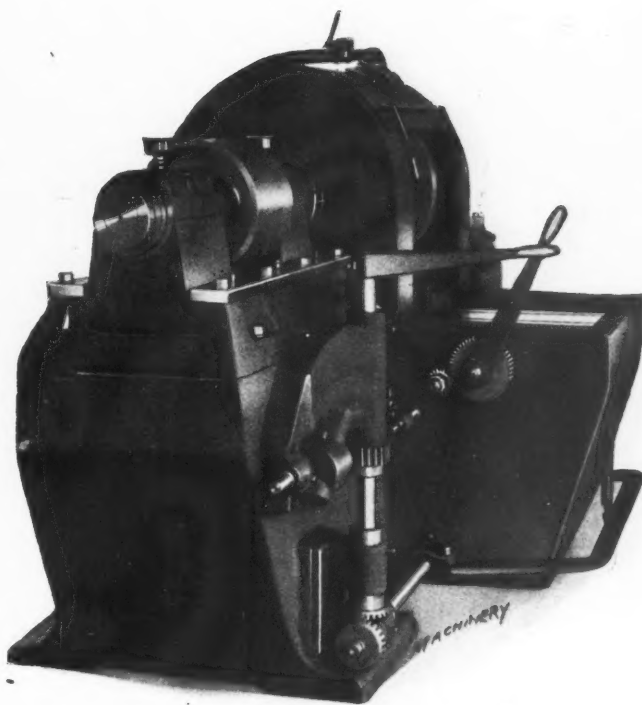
End View, showing Arrangement of Spindle Head and Sub-base
